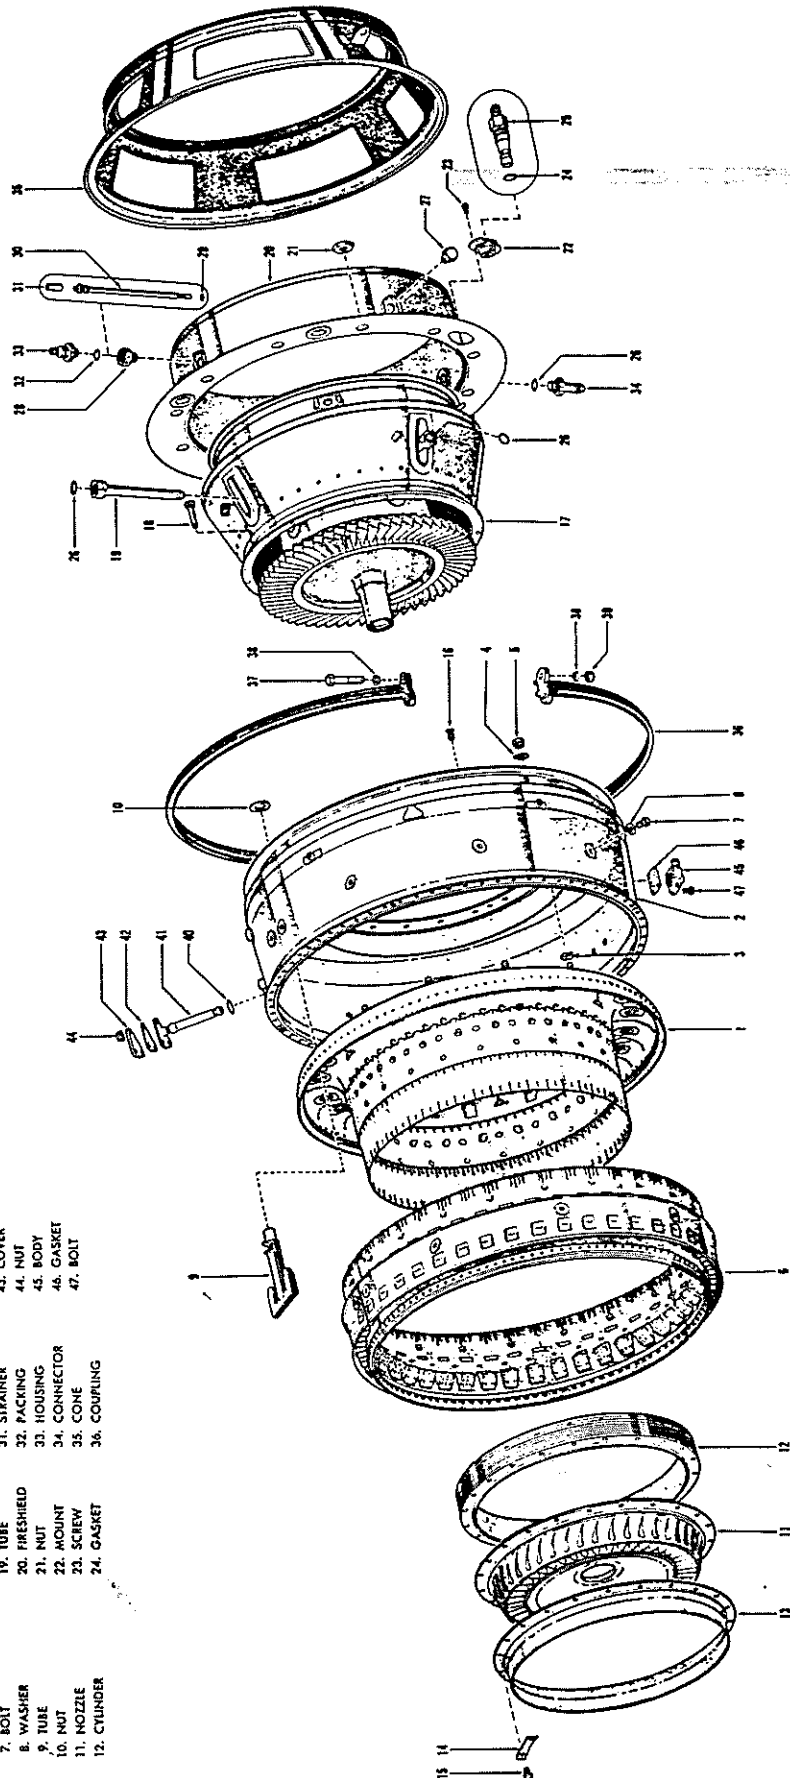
Combustion Chamber, Power Turbine Nozzle and Exhaust Diffuser Assemblies
